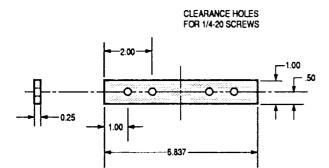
PART C DETAIL OF THE REFLECTOR FEED MOUNT.
